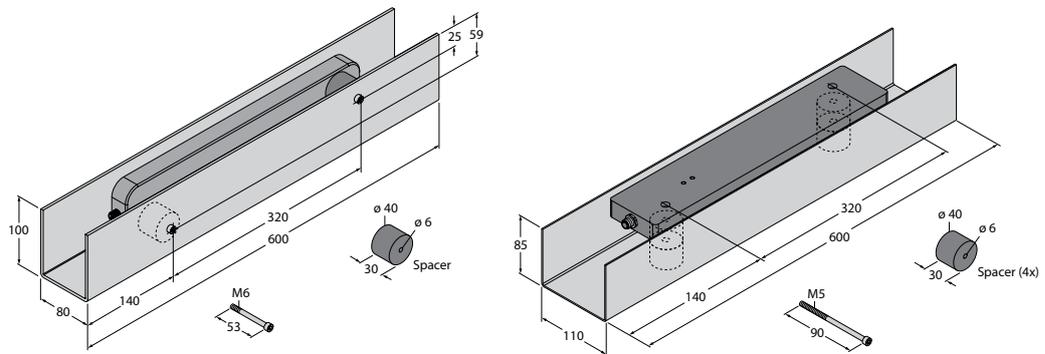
Mounting the TNLr-Q80L400-... read/write head in a U profile
